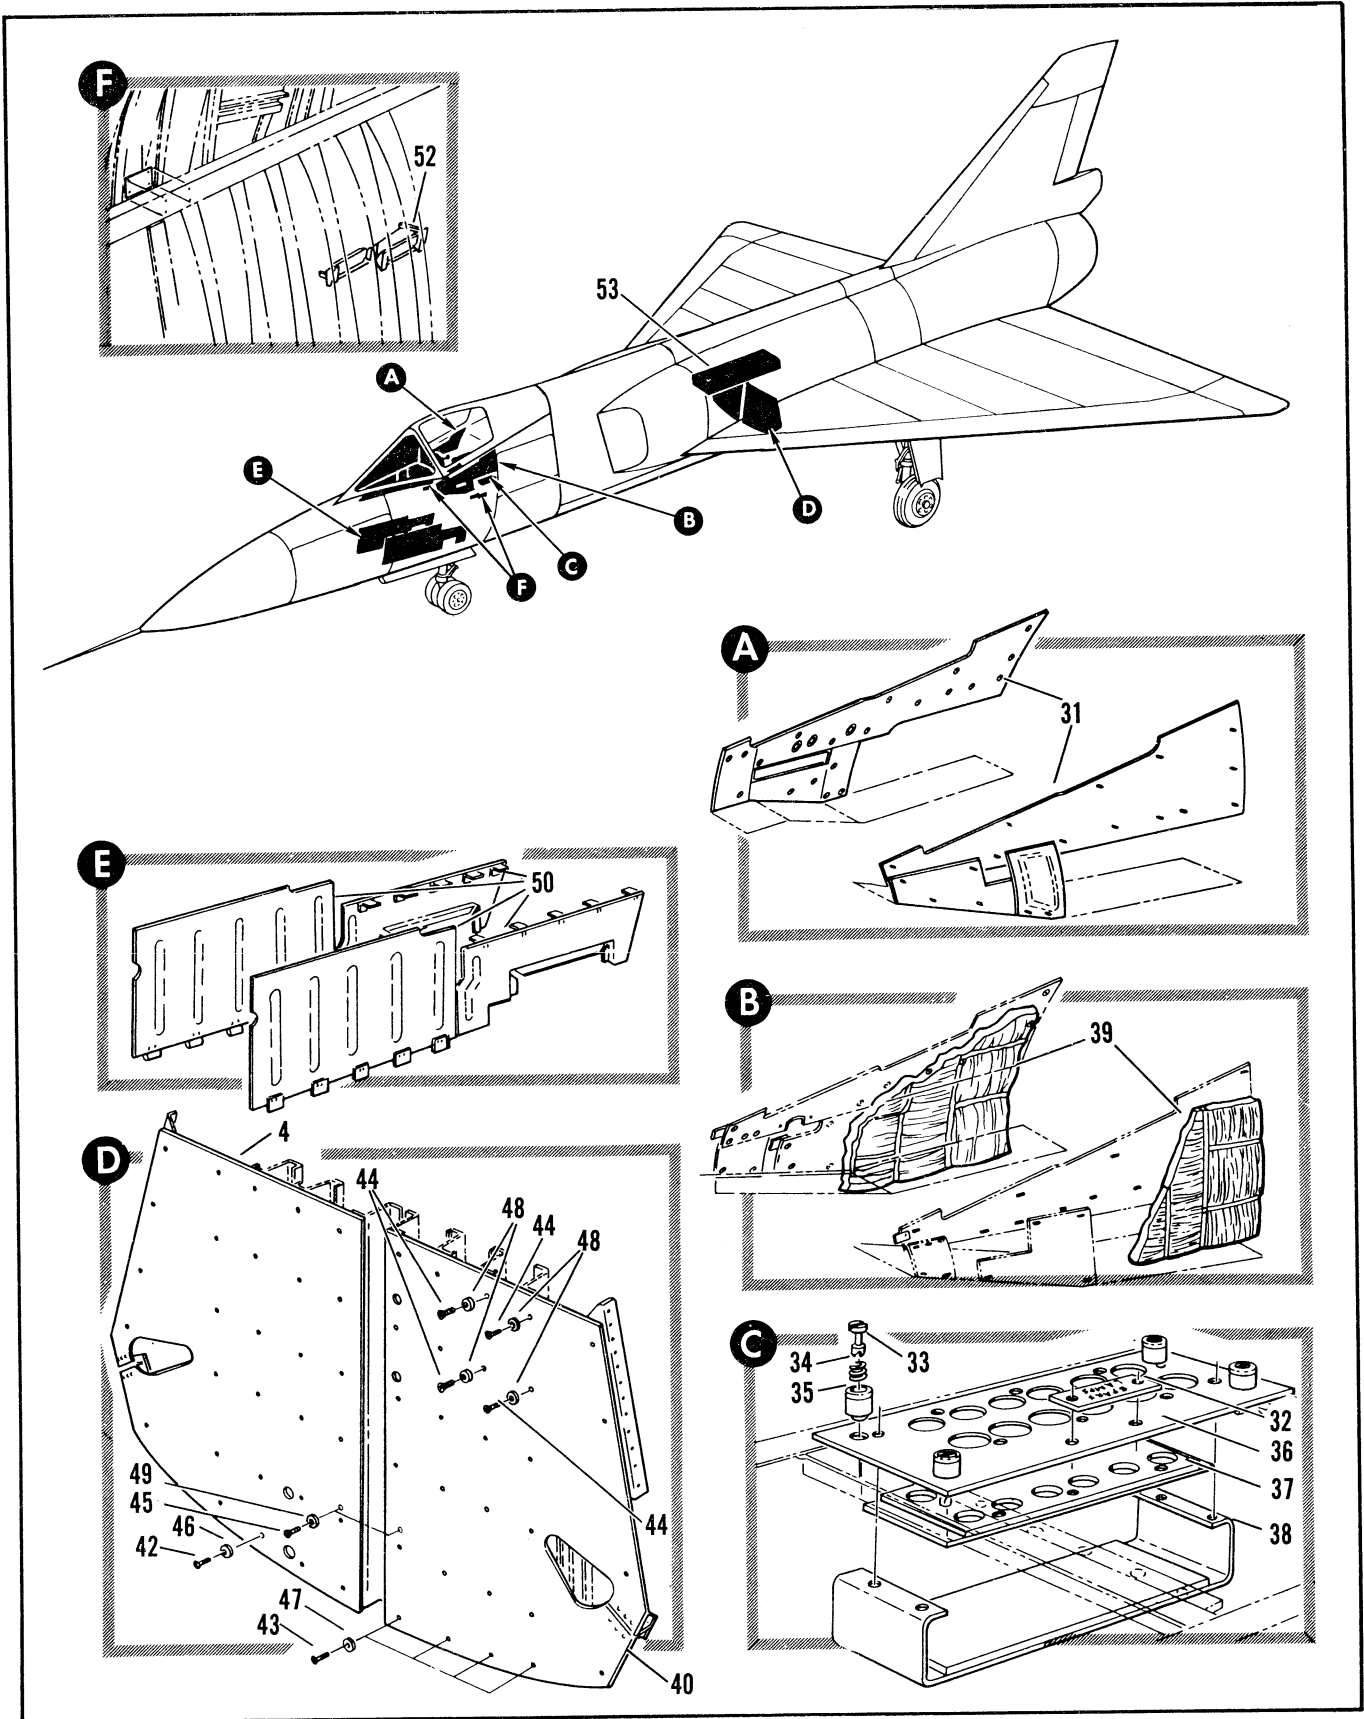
Furnishings (Sheet 2 of 2)
